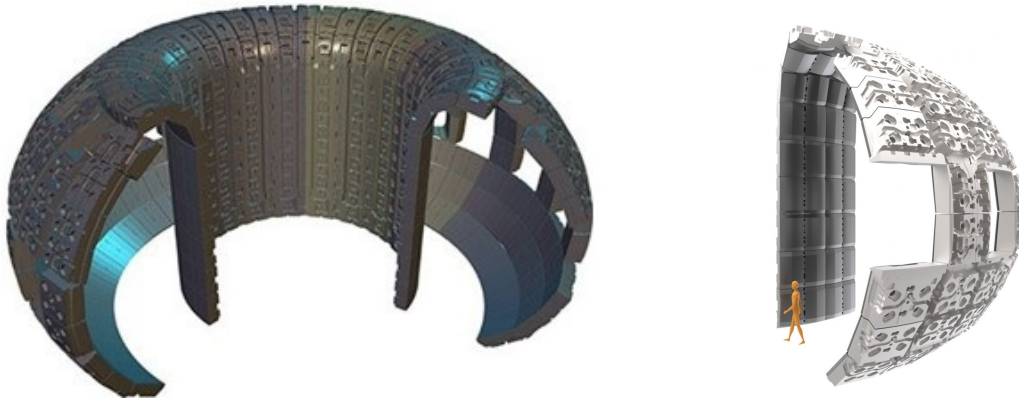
ITER Blanket (left) and Blanket sector (right) [2].
